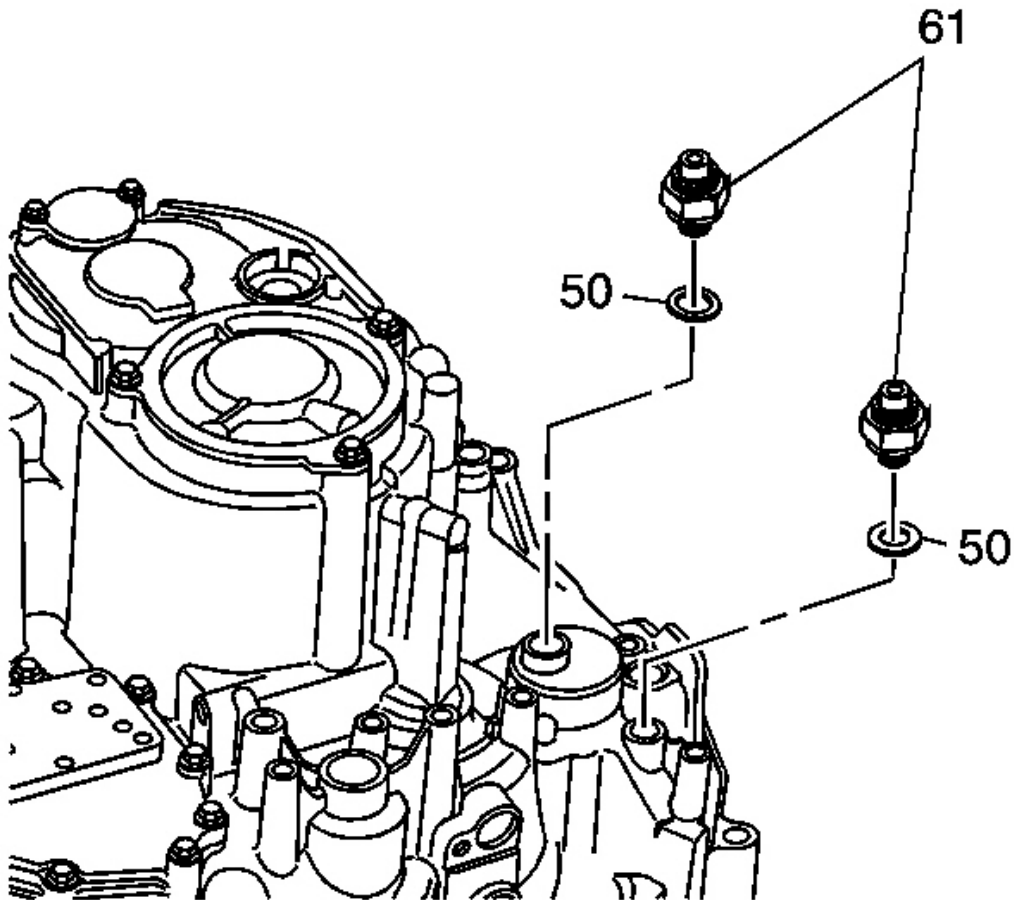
Transmission Fluid Cooler Pipe Fittings & Sealing Washers
